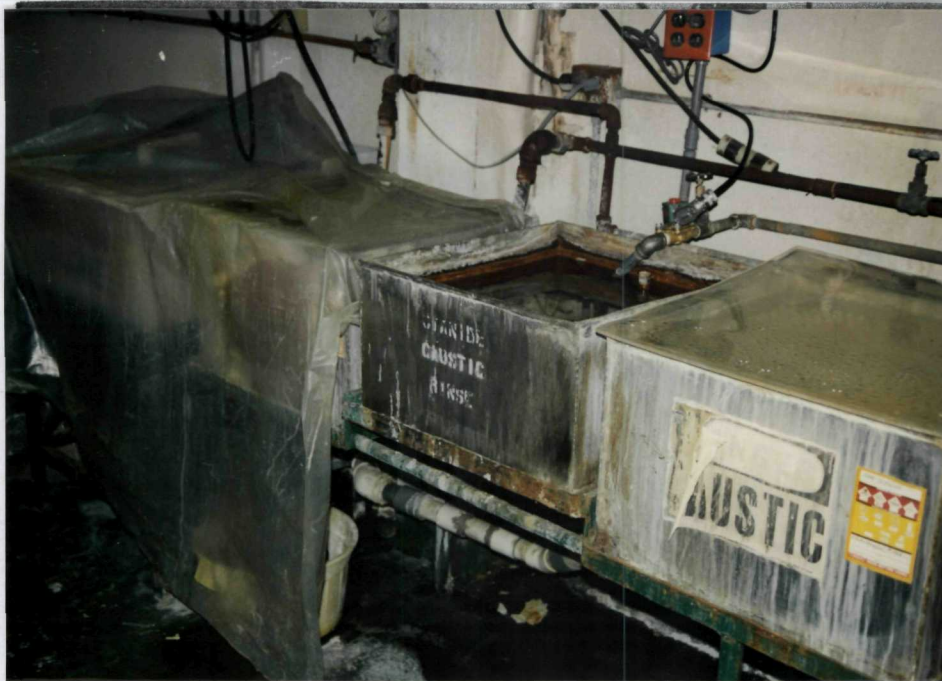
(Roll 2) SWMU No.: 9 - Plating Lab
